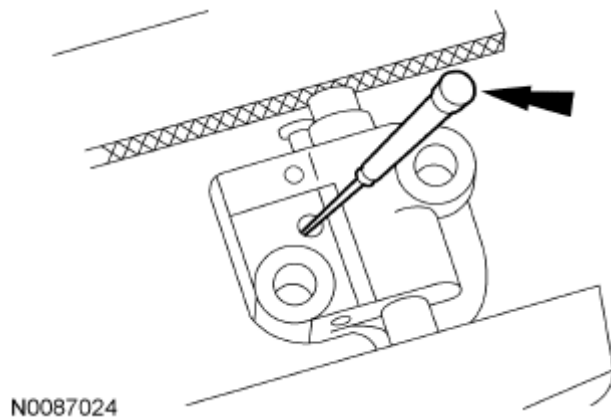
Holding Chain Tensioner Ratchet Lock Mechanism Away
